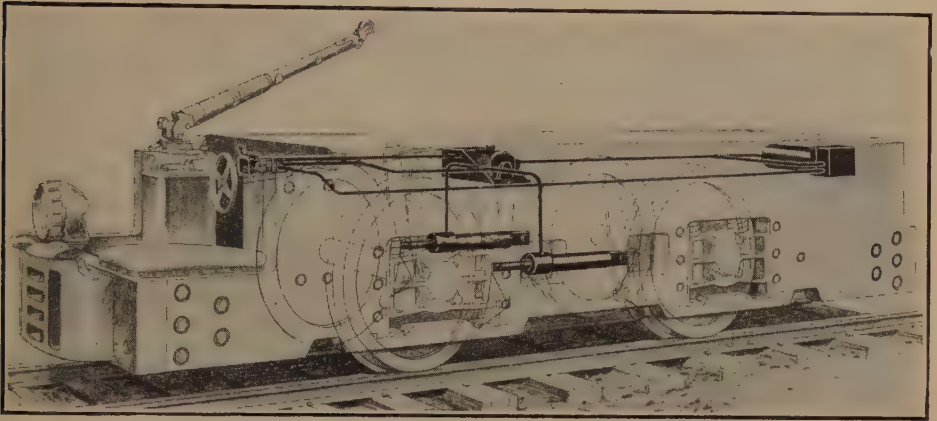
HAULAGE LOCOMOTIVE EQUIPPED WITH HYDRAULIC BRAKES.
